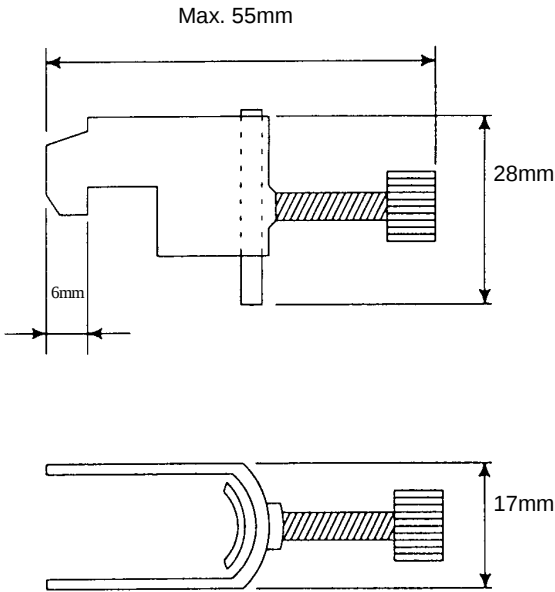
(e) Outer drawings of metal fittings for clamp
